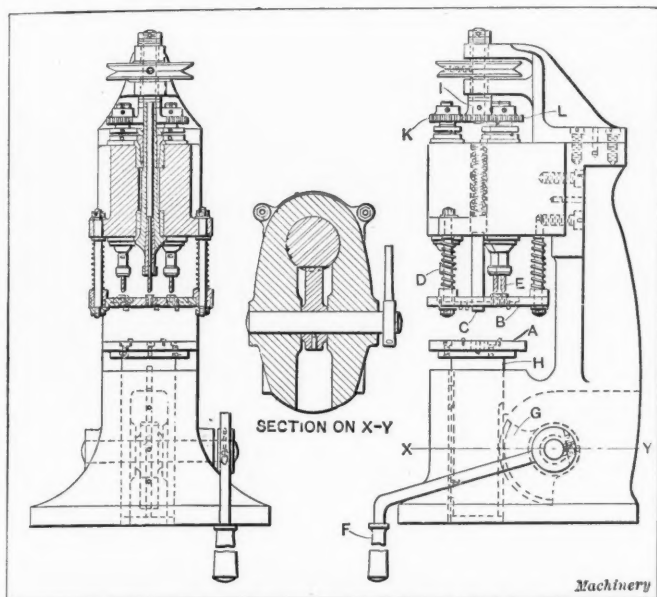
Construction of Three-spindle Drilling Machine shown in Fig. 20
